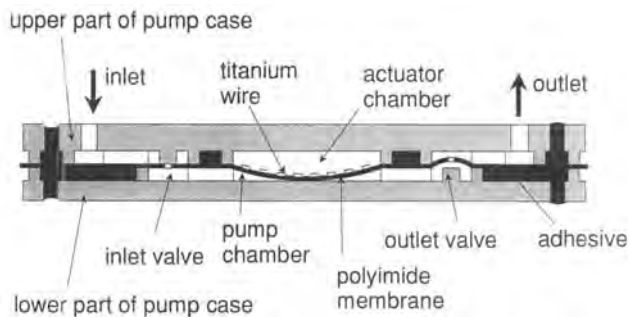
Schematic view of a micropump consisting of two molded parts from PSU and a polyimide membrane mounted in between.
